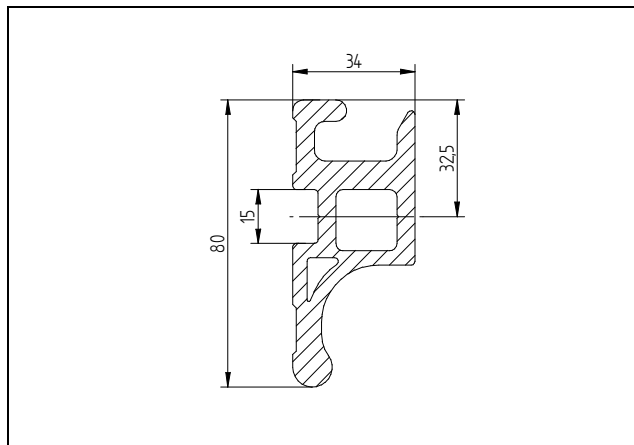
Single pivot shoe bearing - 6.090.121.00
